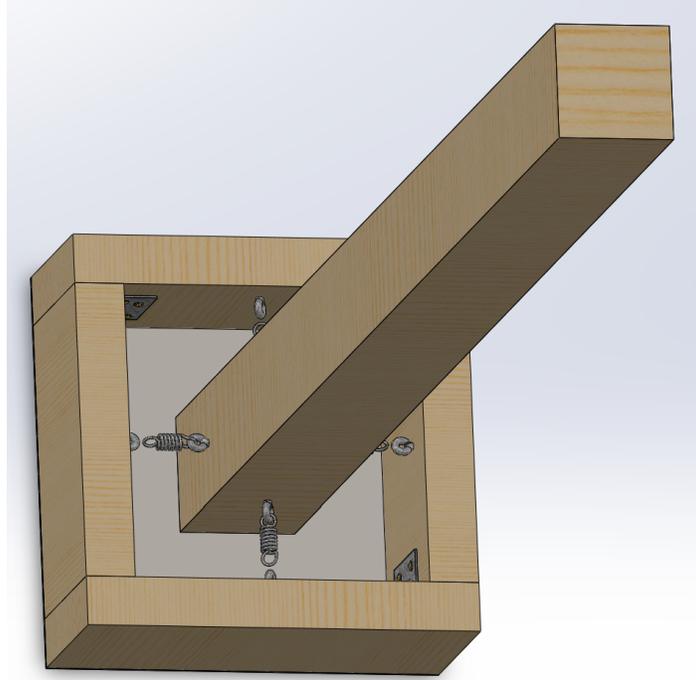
Angled view of the proposed dock deformation mechanism assembly
